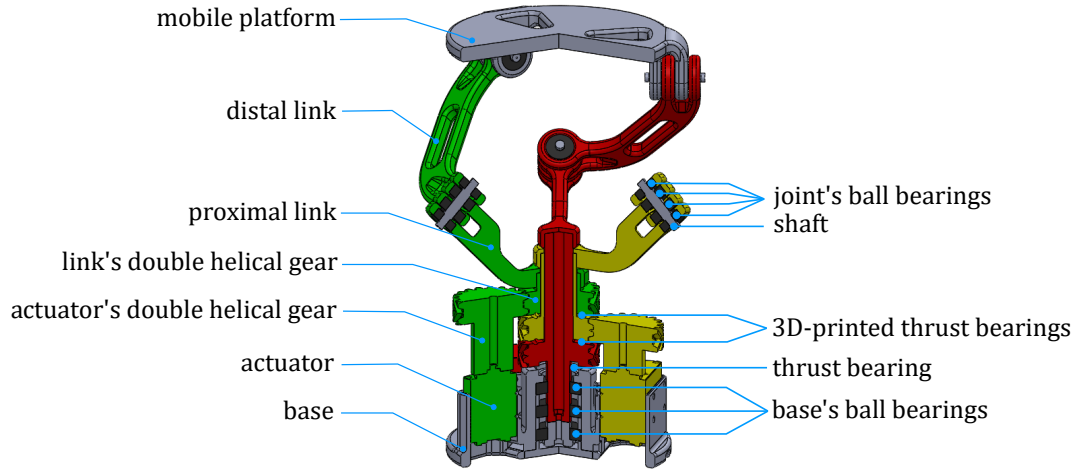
Cross-sectional view of the coaxial SPM CAD model
